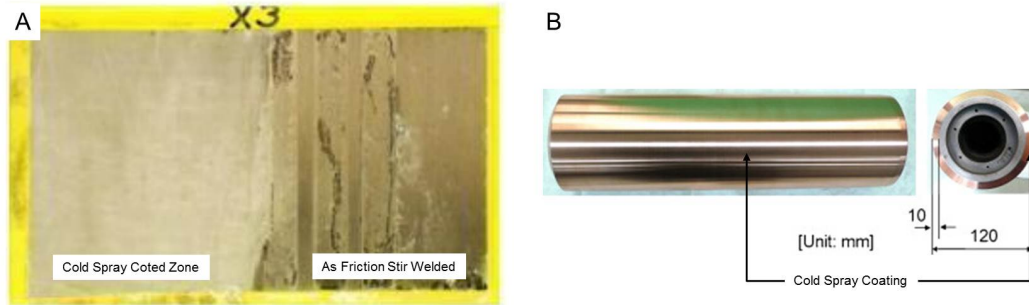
(a) Aluminum coating protection friction stir welded joint [14]. (b) Copper canister prototype for long term corrosion protection of nuclear waste [15]
